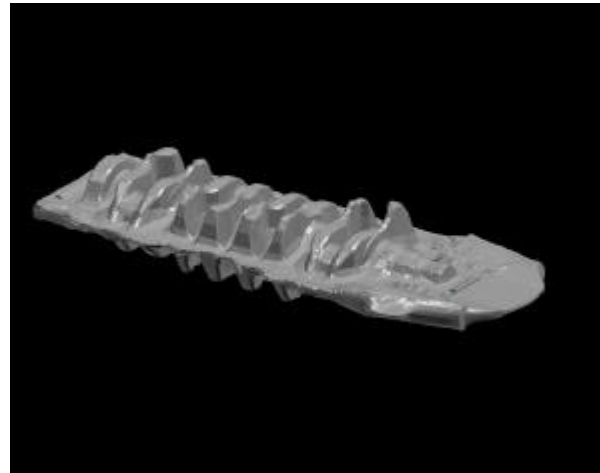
Final shape of the crankshaft in intermediate forging operation.
